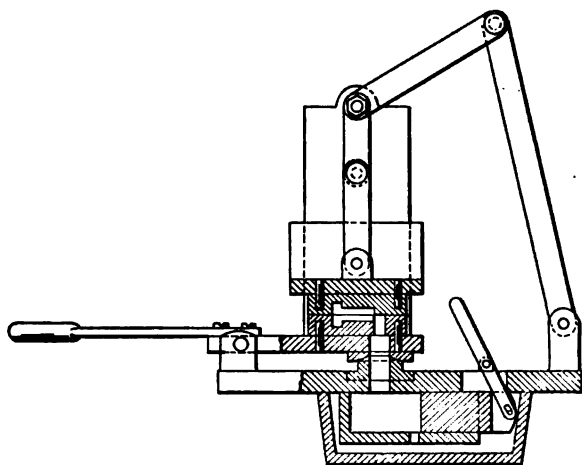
UNDERWOOD DIE-CASTING MACHINE.
